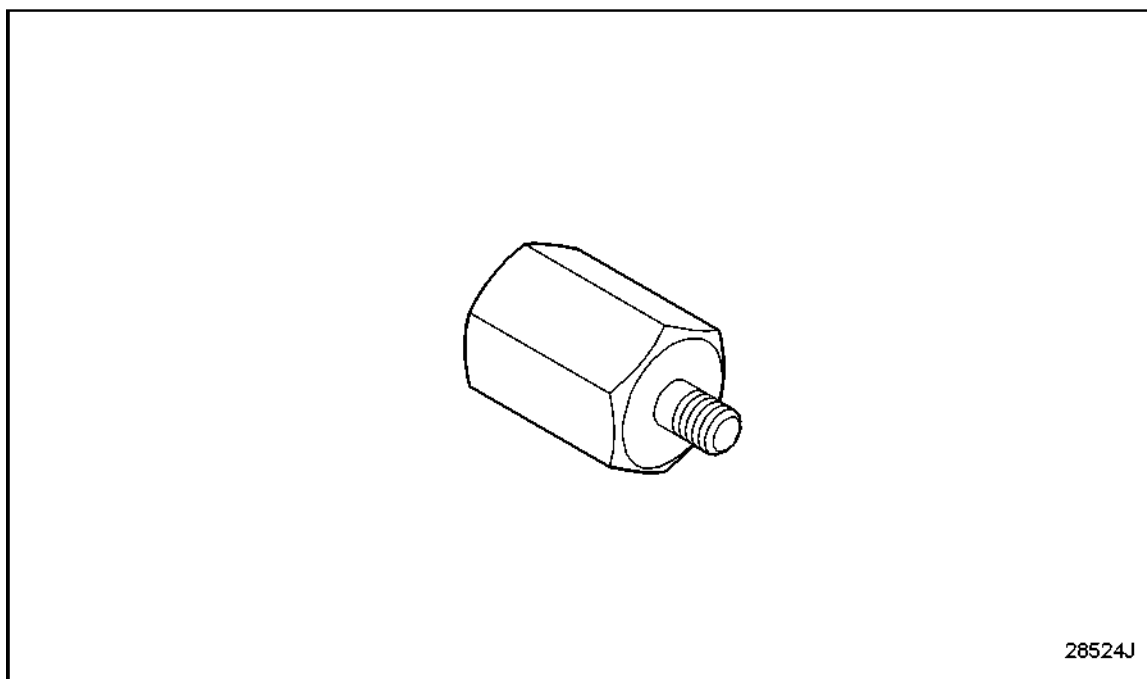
Valve Bridge Guide (Broken) Remover,J 7453
